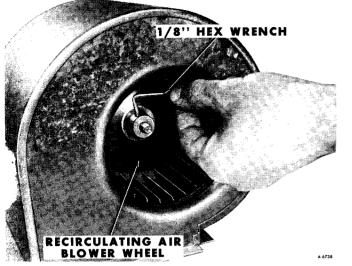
Loosening Recirculating Air Blower Wheel Retaining Screw
